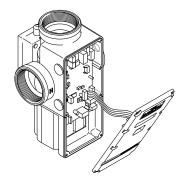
Caution heavy parts. Carefully remove cover and disconnect display cable.
